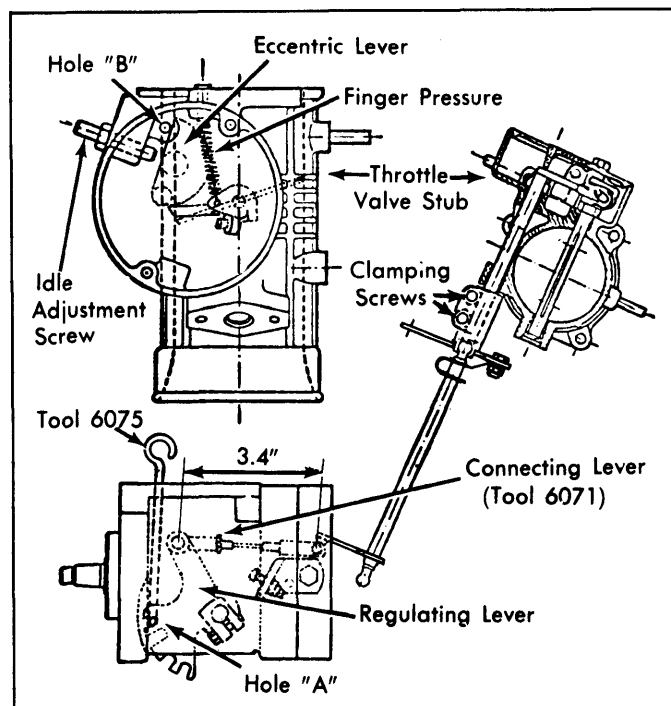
Pump & Throttle Valve Linkage Adjustment
